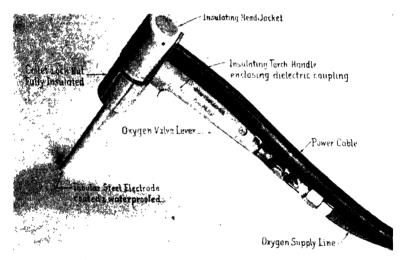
Underwater cutting electrode holder (Courtesy of: Craftsweld Equipment Corporation)
